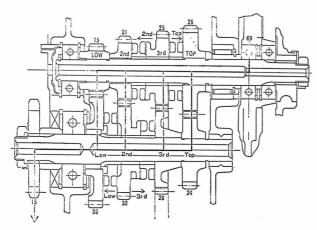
Cross sectional view of YA-6 four speed transmission. Number above or below gears is number of teeth on that gear.
